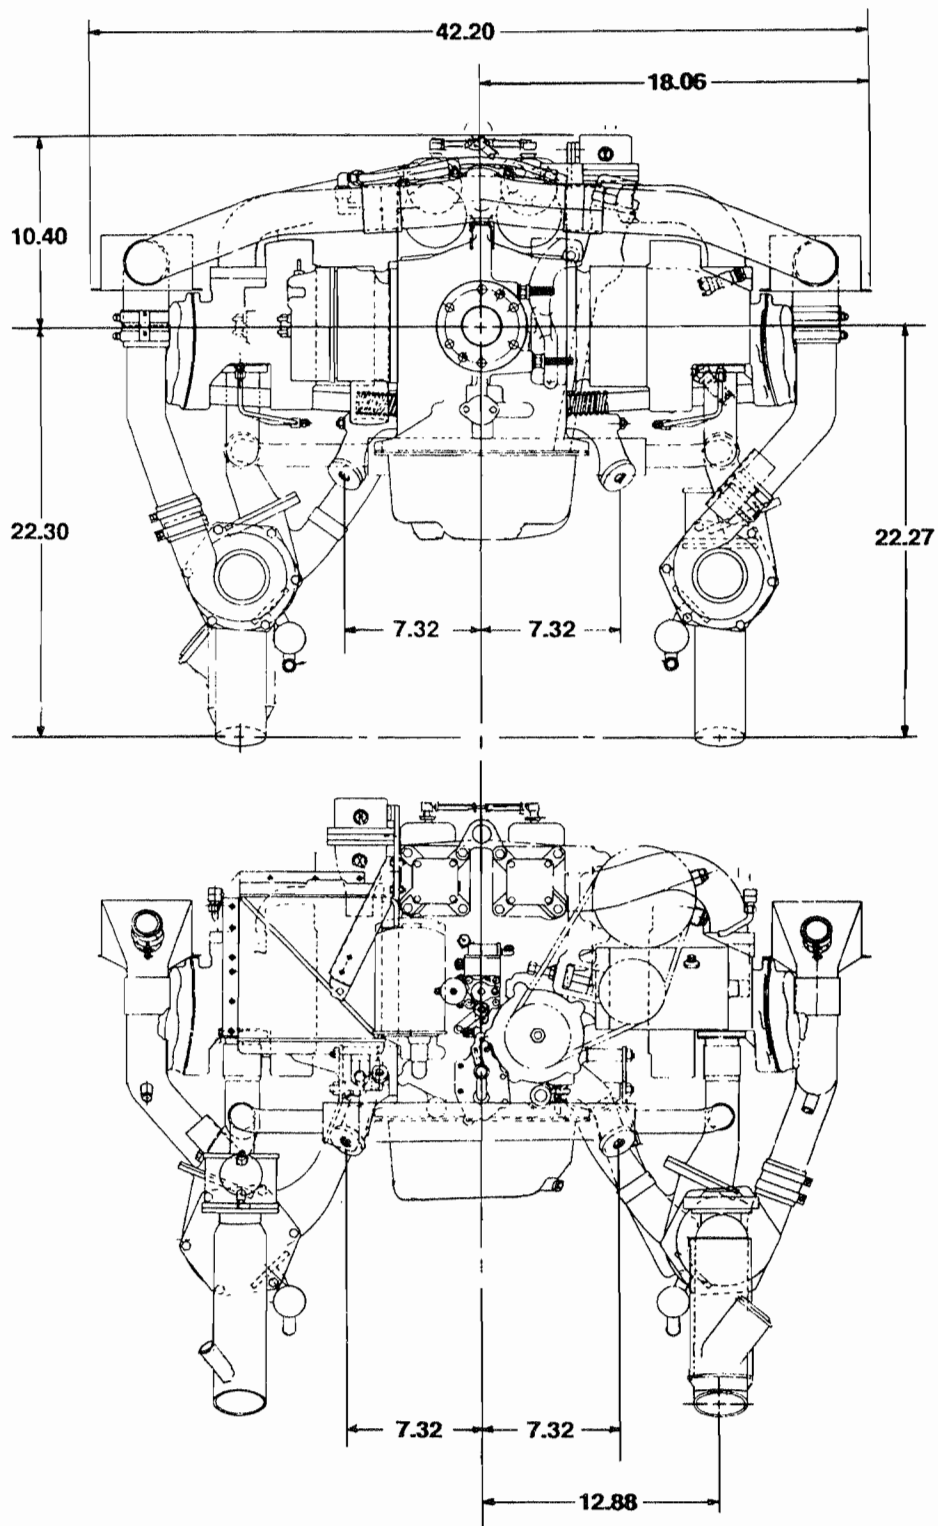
INSTALLATION DRAWING TSIO-520-BE
